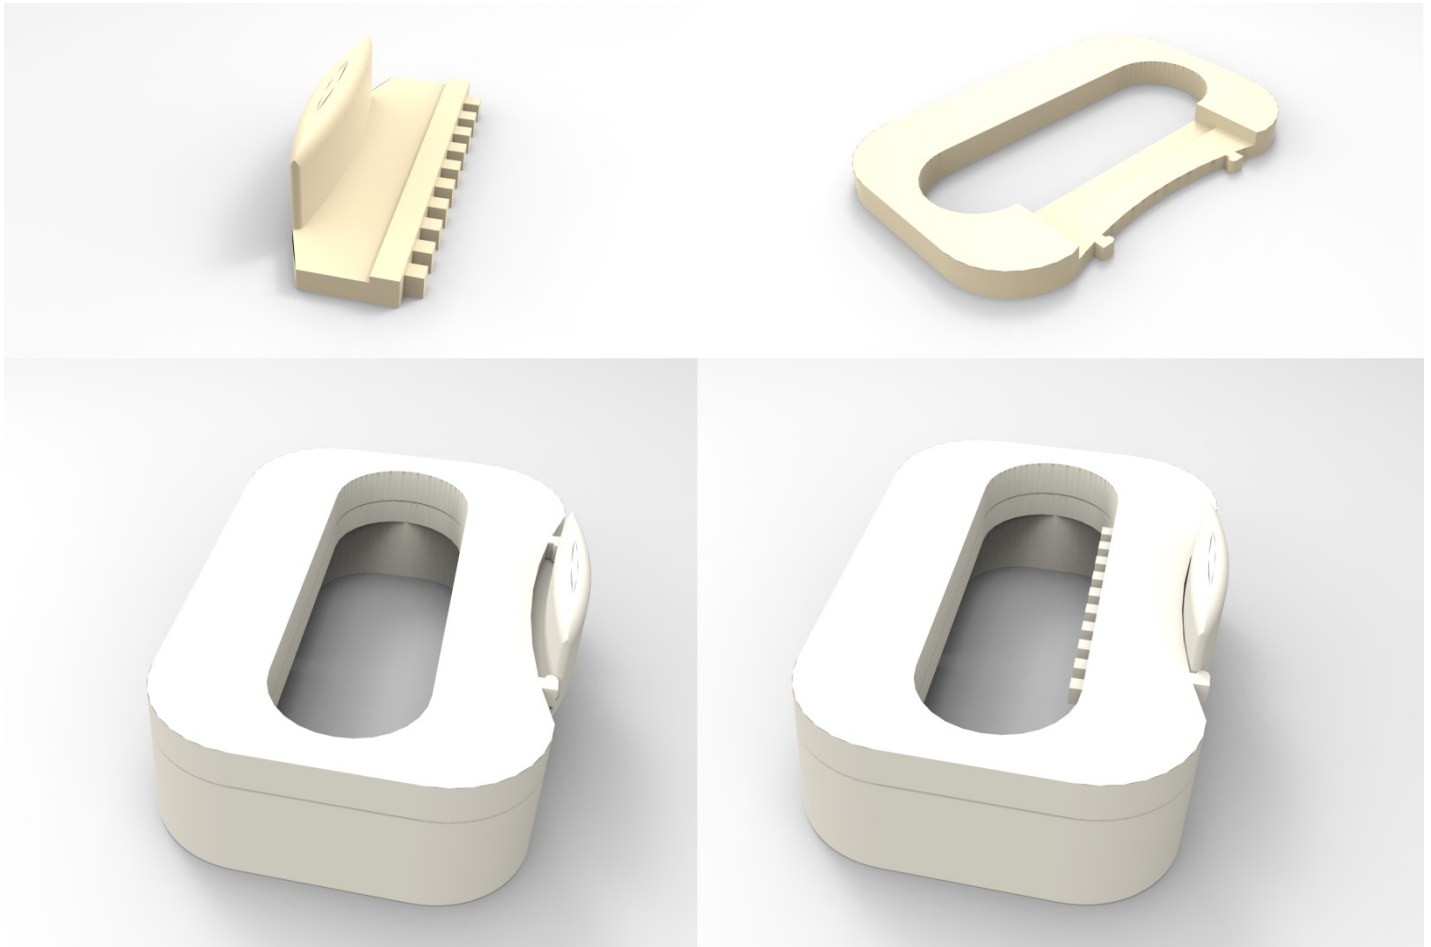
Concept of the locking mechanism for the Rotador. Top left: the locking part. Top right: the extension of the locking plate the holds the locking part. Bottom left: The mechanism unlocked. Bottom right: the mechanism locked.
